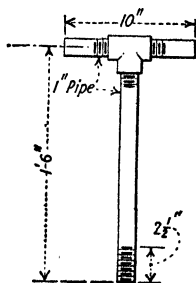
Handle made of pipe and fittings for lifting concrete covers.
